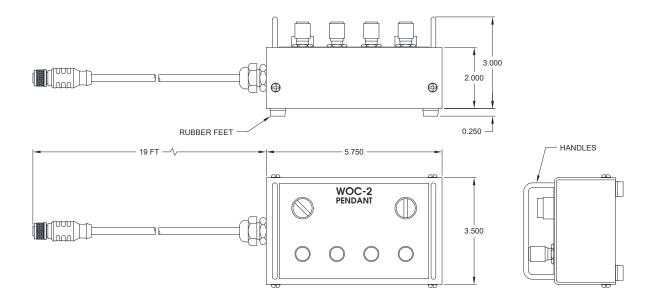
WFD-3 Operator Pendant Dimensions
